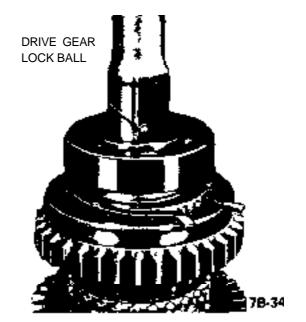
B-34 Speedo Drive Gear Lock Ball on Mainshaft
